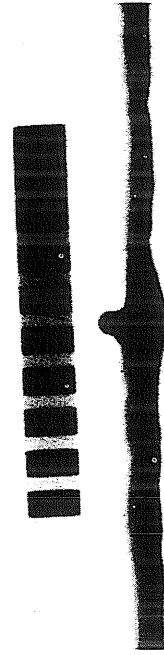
MACROSTRUCTURES OF COPPER JOINTS WELDED BY THE INERT-GAS - SHIELDED - ARC PROCESS
